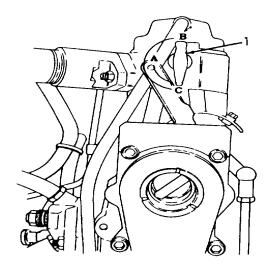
Cylinder Head and Piston Bumping Clearance Measurement.
